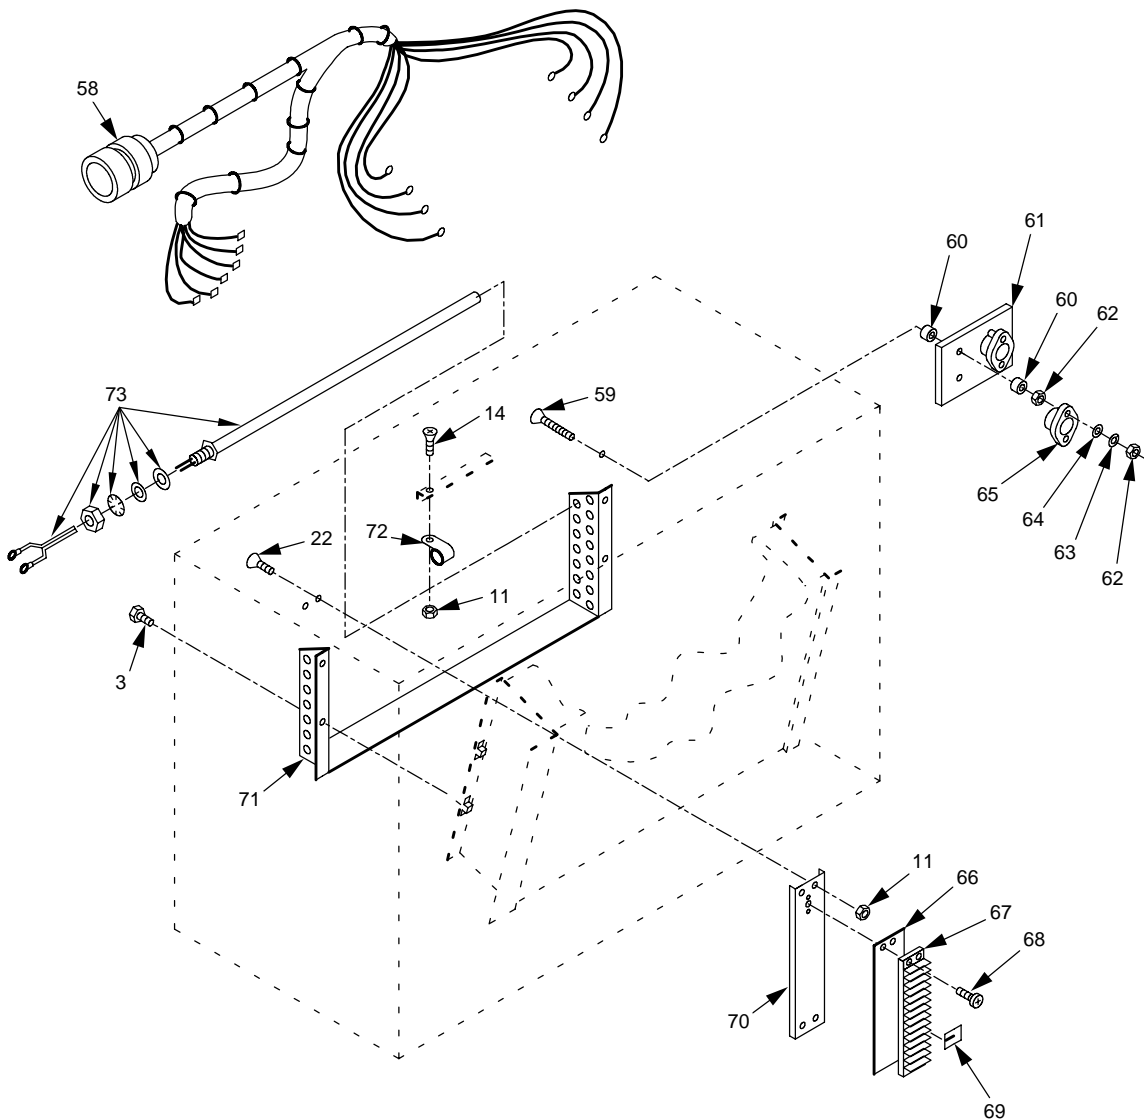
Evaporator Assembly (Sheet 4 of 4)
